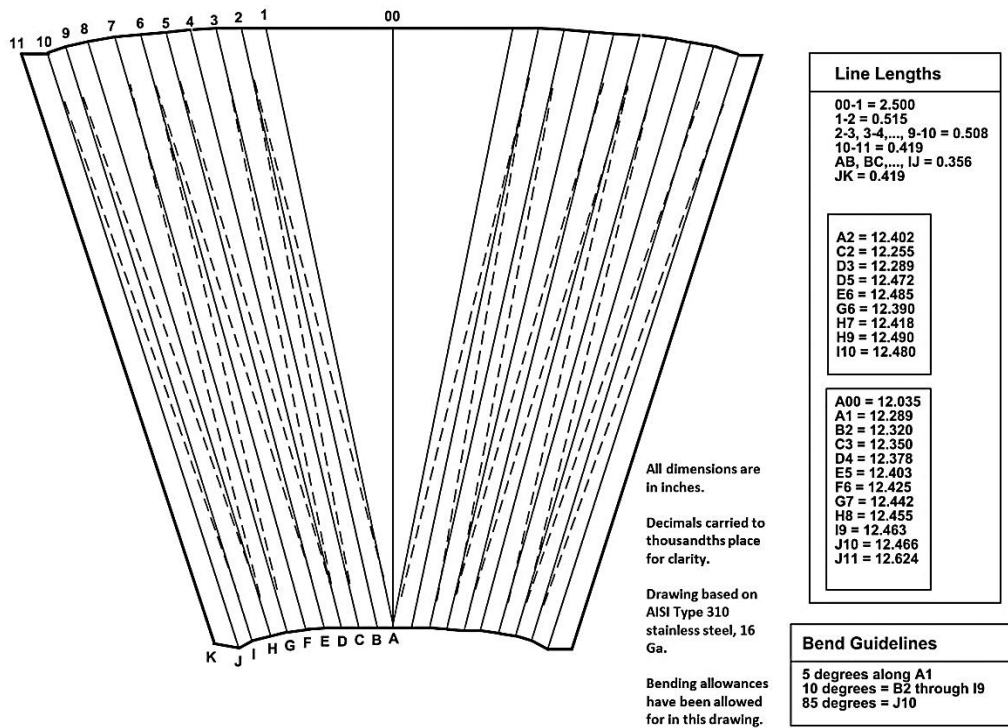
S-24. Burner Cone Layout and Bending Pattern
